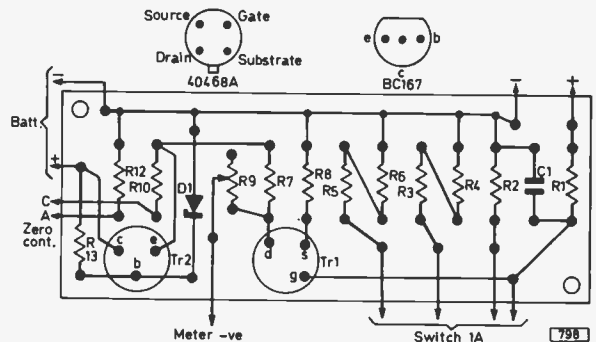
Suggested layout for the printed board on which the small components are mounted. The actual size of the board is 3½ x 1 3/8 in.
